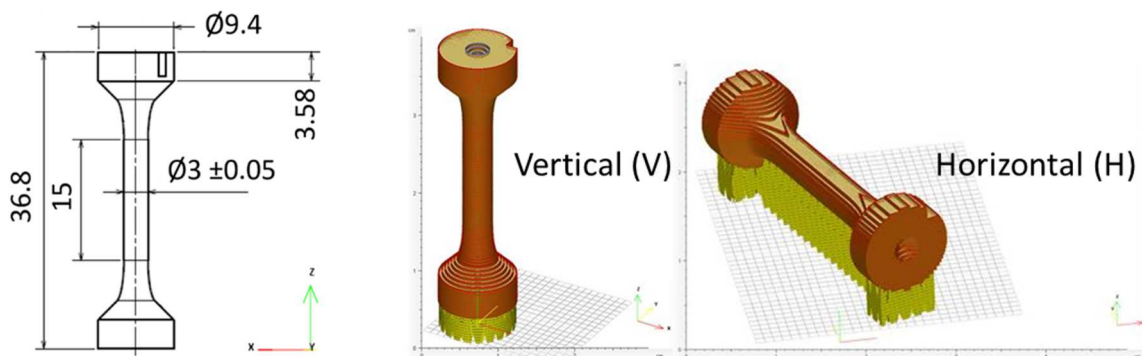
Test part geometry (left); vertical and horizontal building orientations (right).
